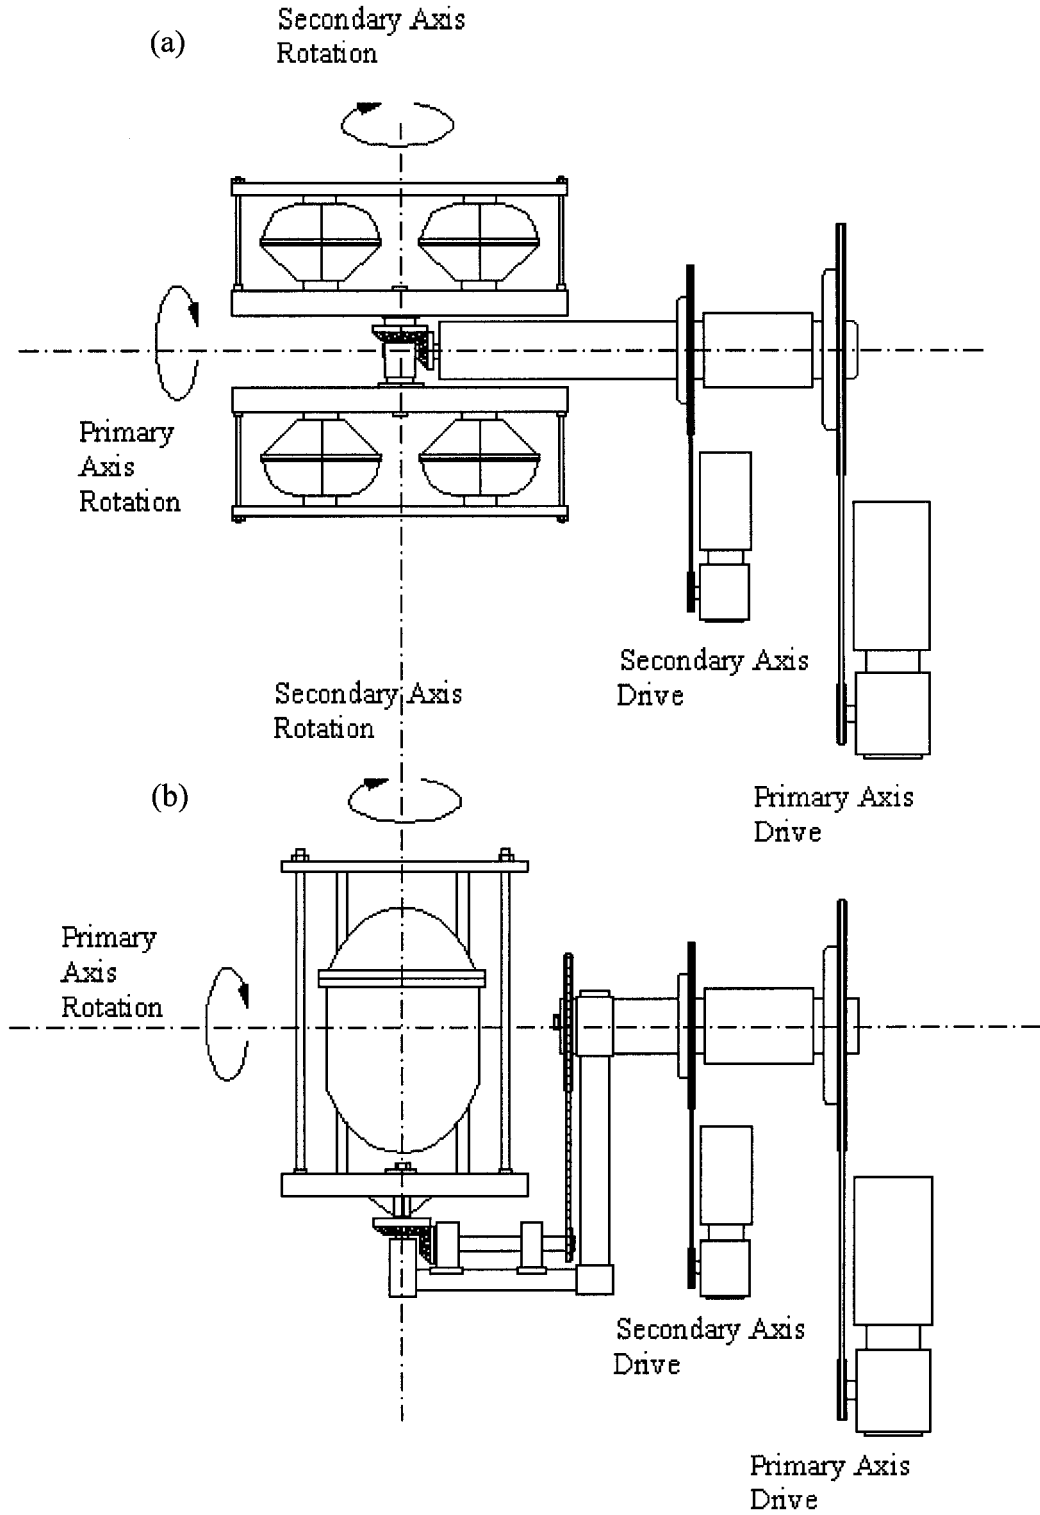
Typical configurations of mold-mounting assemblies for biaxial rotation
